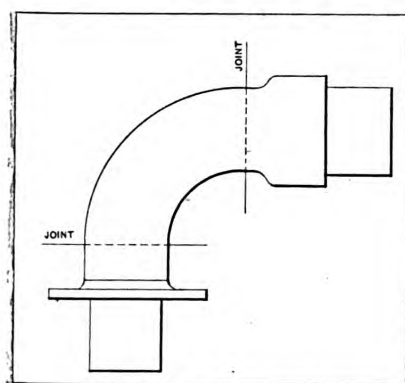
Plan of Drawing Board with Half of Pattern in Position.
